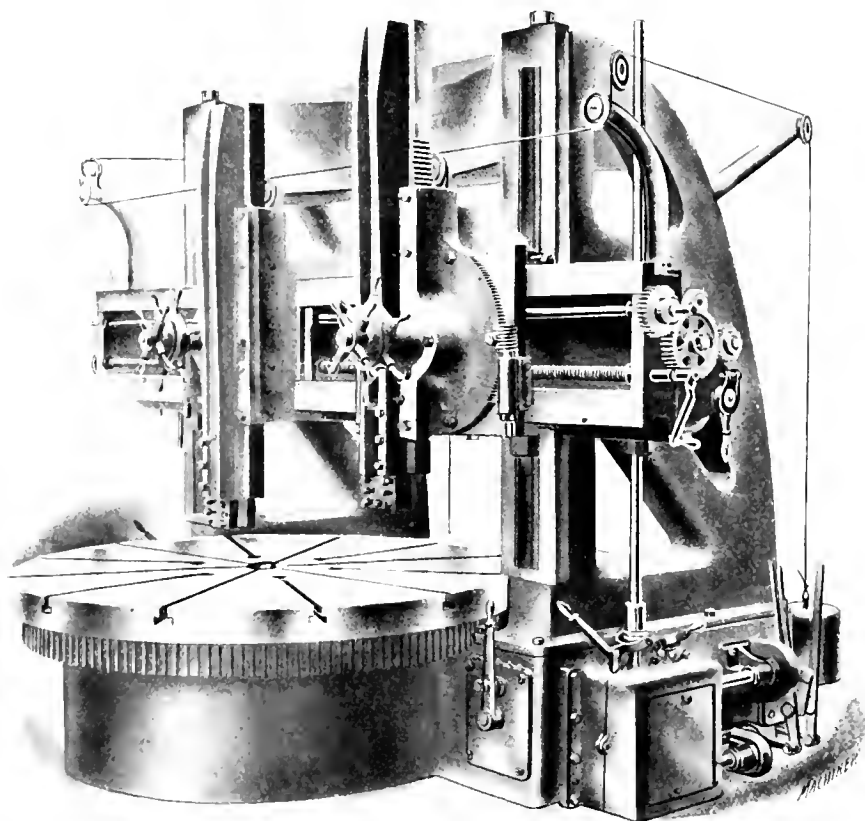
Poole Boring and Turning Mill, 7 to 14 feet Swing.
